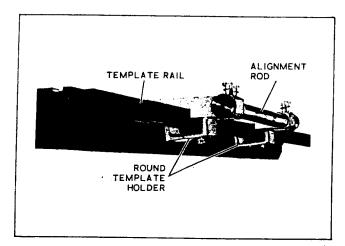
Alignment Rod Installed in Round Template Holder (Bottom View)
